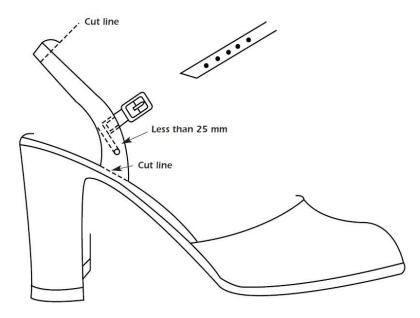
CUTTING OF TEST ASSEMBLY-BUCKLE STRAP ATTACHED TO SLING-BACK STRAP
